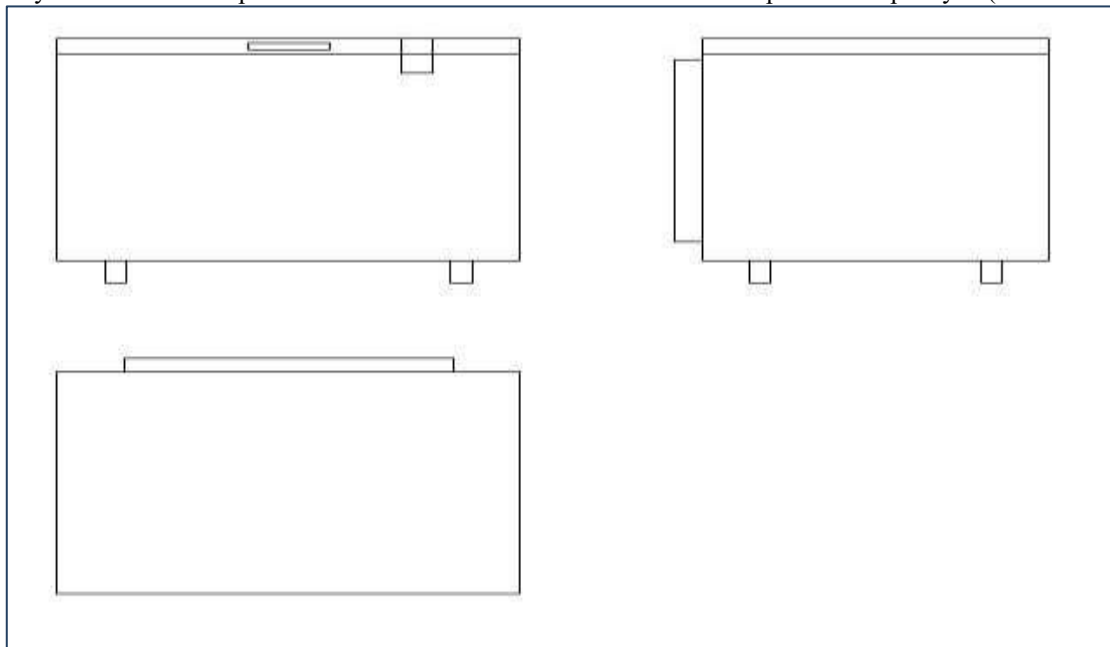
Orthographic views showing the plan, front and end elevations of freezer
